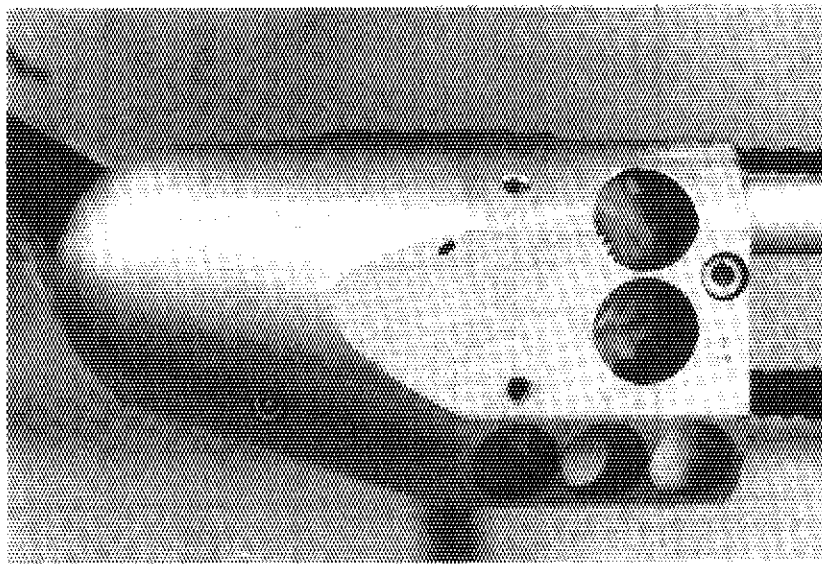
Differential gear box disassembled from inner tube bottom end
